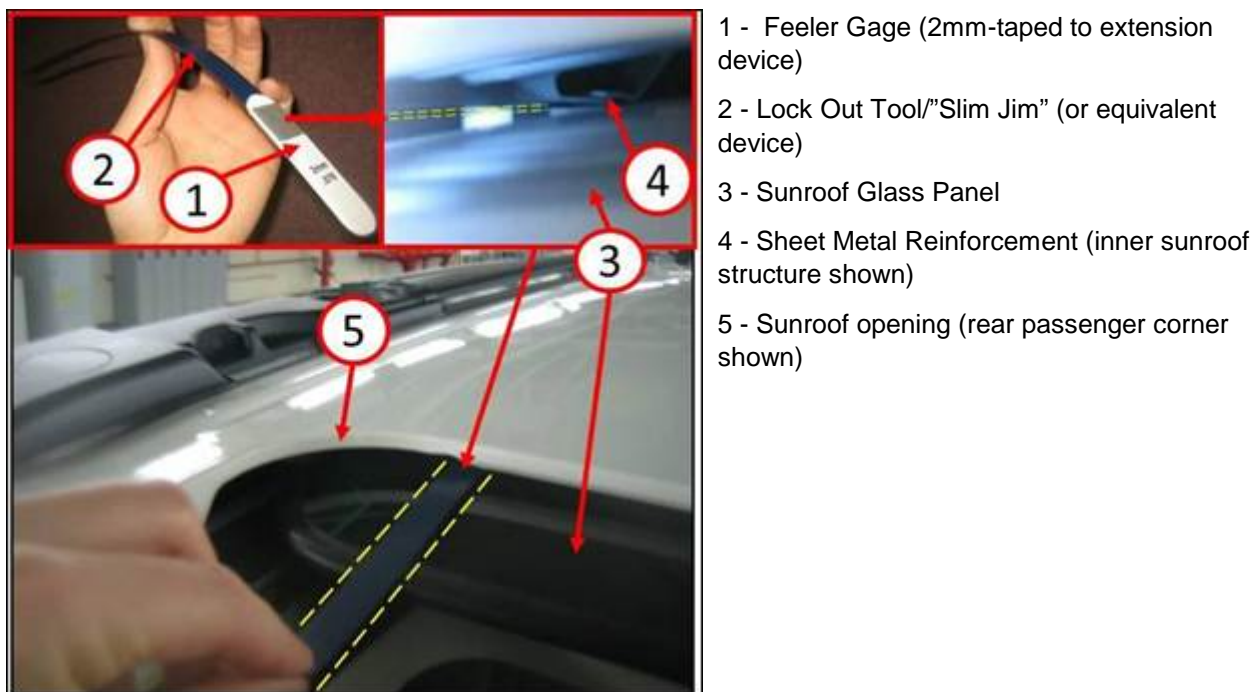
Inspect gap between sunroof glass and roof reinforcement.
